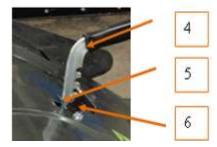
Adjusting the shredding grade 4- handle, 5 – bolt, 6- compression spring
